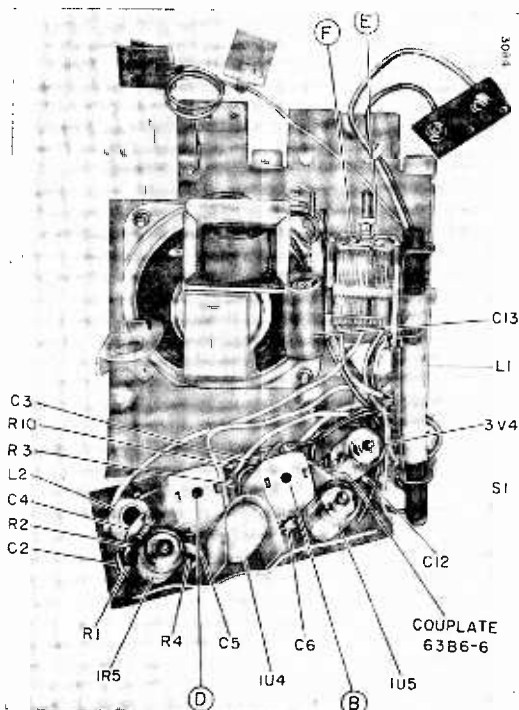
Top view of the printed chassis shown in Fig. 5, illustrating the arrangement of components.
